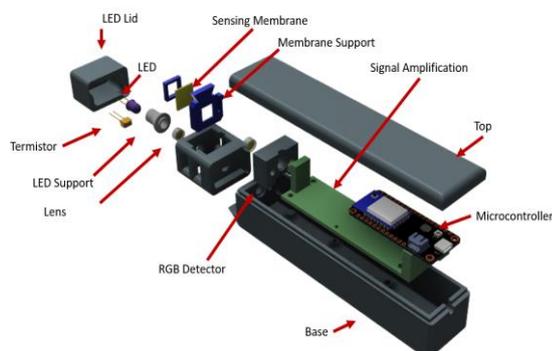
Exploded view of the sensing prototype showing all the internal components
